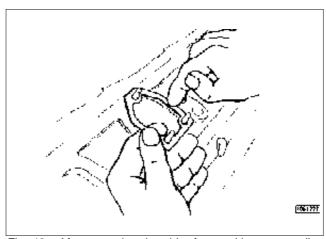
After smearing the shim faces with some sealing adhesive place the shim packs between pumps and block. Subsequently perform injection pump installation;
